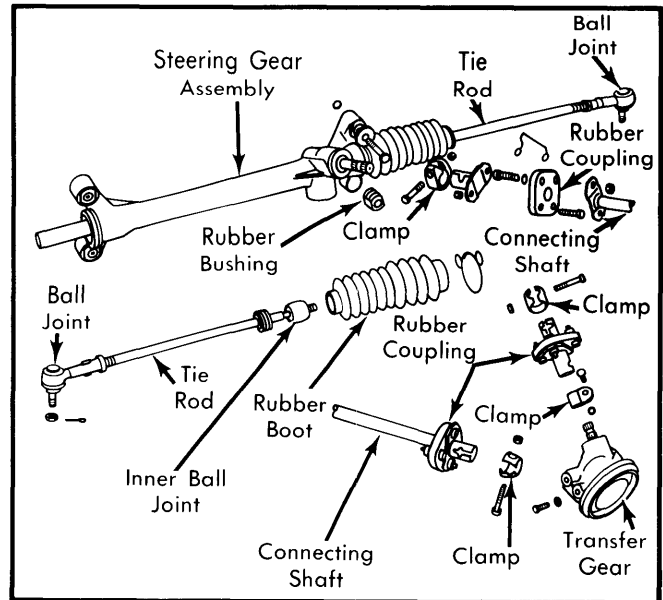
Exploded View of Volkswagen Vanagon Steering Gear and Transfer Gear Assembly
